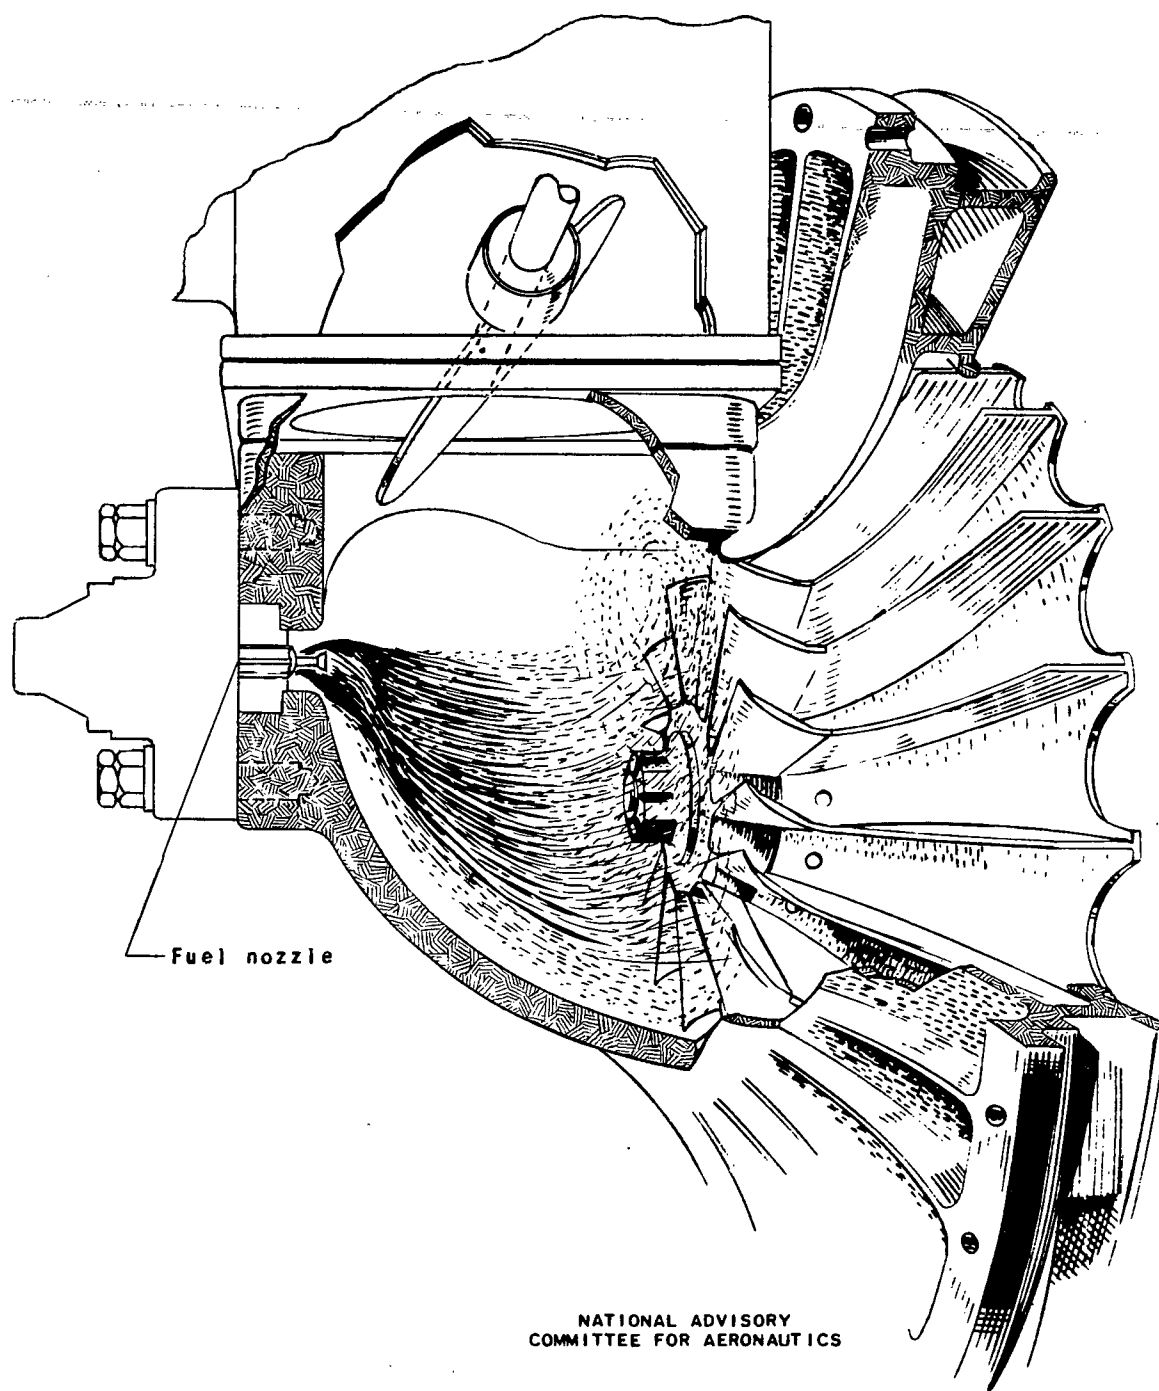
Concluded. Drilled-inducer fuel-injection system.
